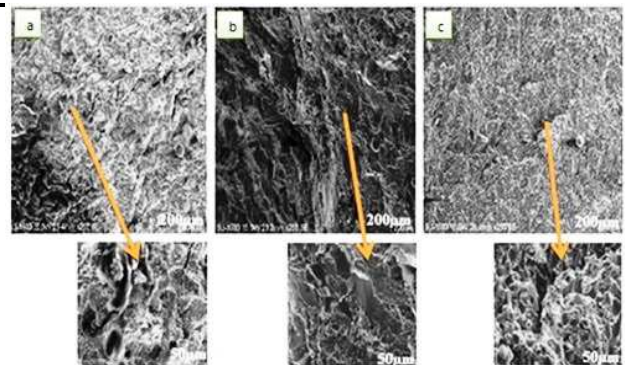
Fractured surfaces of tensile specimens weld joint were welded by the composite tubular electrodes
